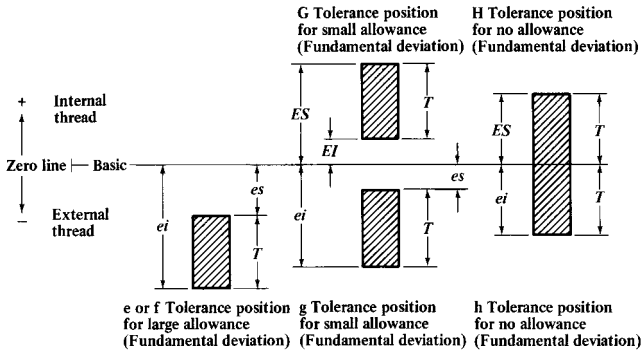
Metric Tolerance System for Screw Threads
